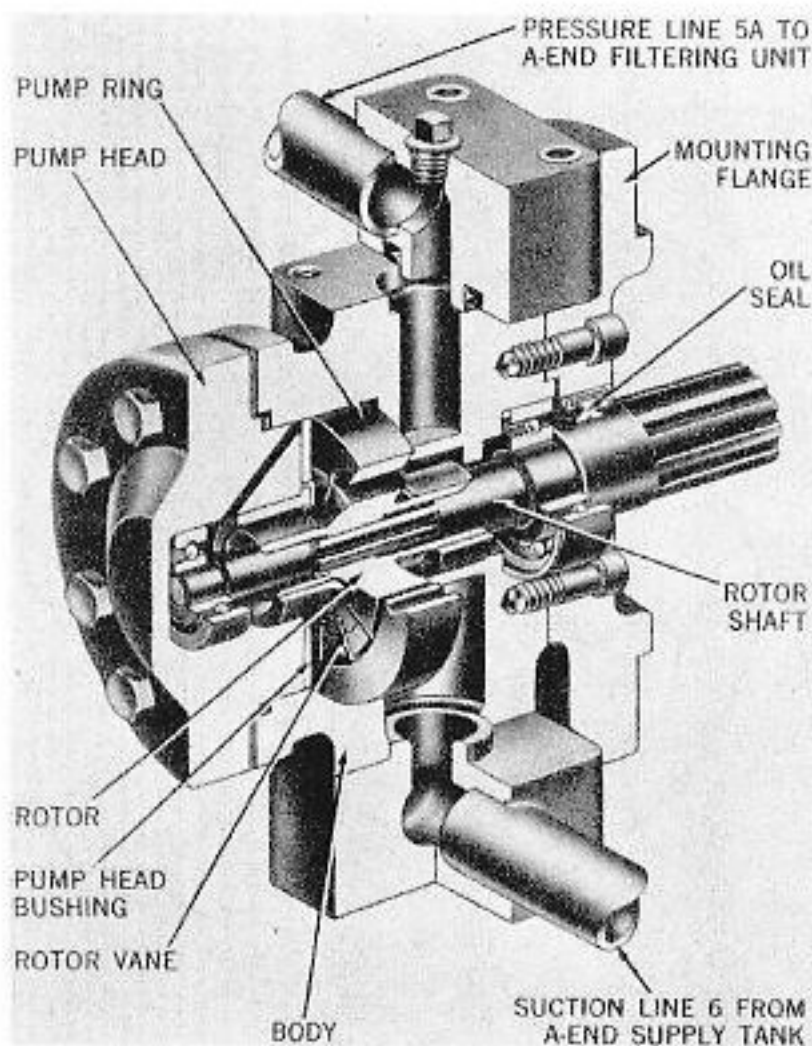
Auxiliary Pump Assembly, Cutaway View
